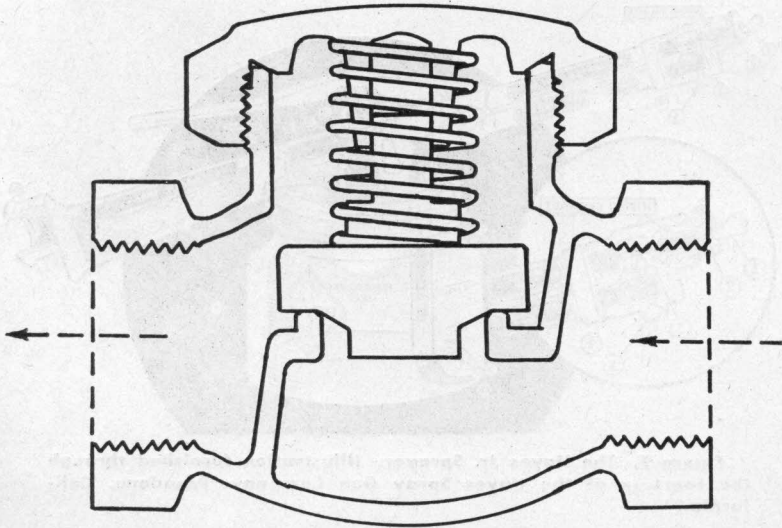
Drawing of a spring-loaded check valve. (Diagrammatic sketch from an illustration furnished through the courtesy of Jenkins Brothers, Manufacturers of Valves, Bridgeport, Connecticut.)
